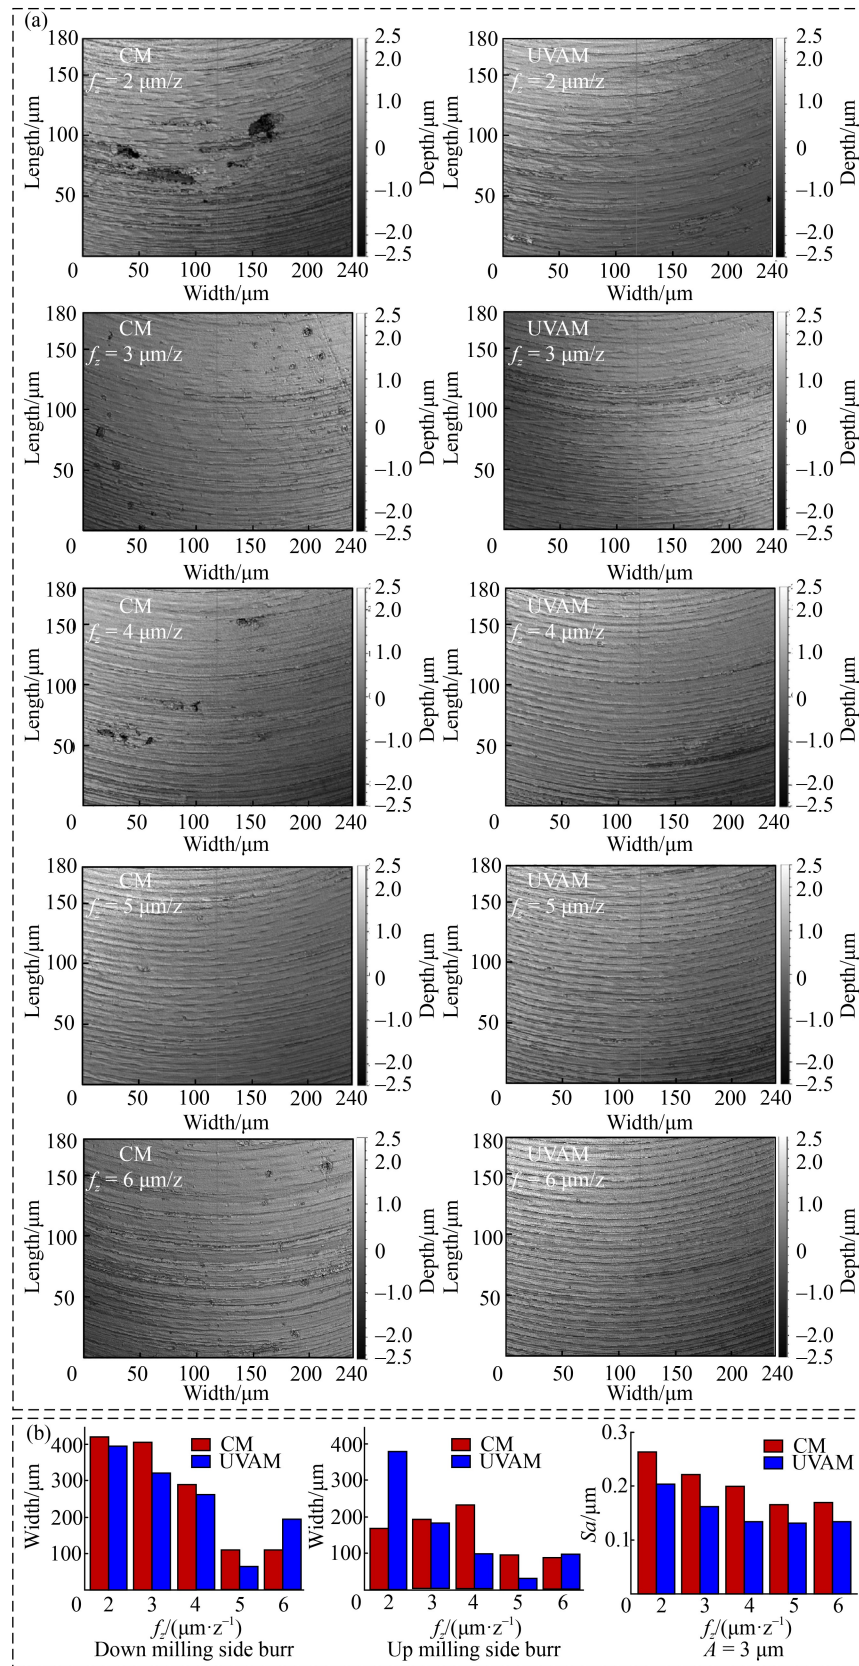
Changes in surface morphology, burr size and surface roughness under different f_z : (a) bottom surface morphology and (b) burr width and surface roughness [164]. UVAM: ultrasonic vibration-assisted milling; CM: conventional milling. Reproduced with permission from Ref. [164] from Springer Nature.
